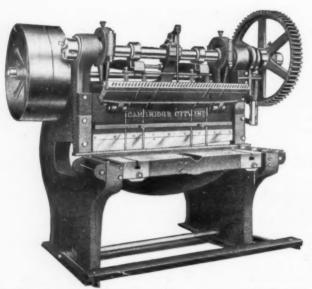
shows the punch-cross-head disengaged, thus converting the machine into a regular shear for shearing only.
